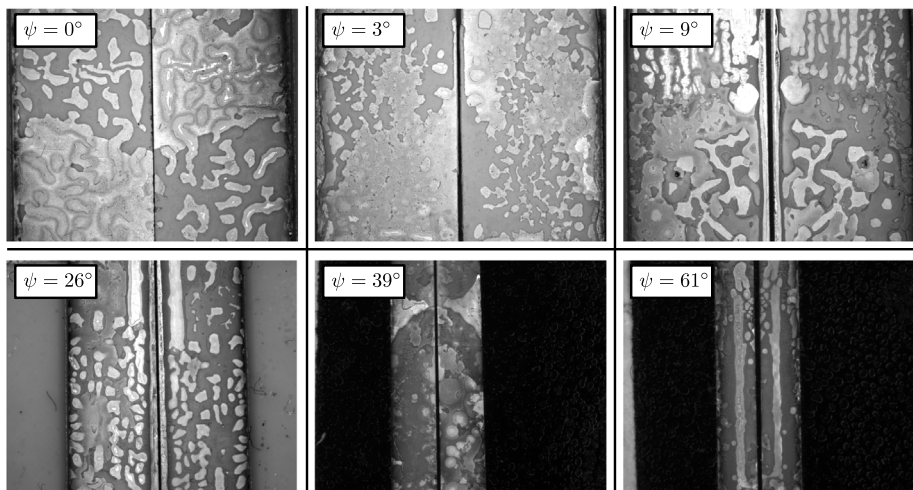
Stereo light microscopy images of the top and bottom fracture surfaces of the delaminated nanoparticle sintered silver samples.
